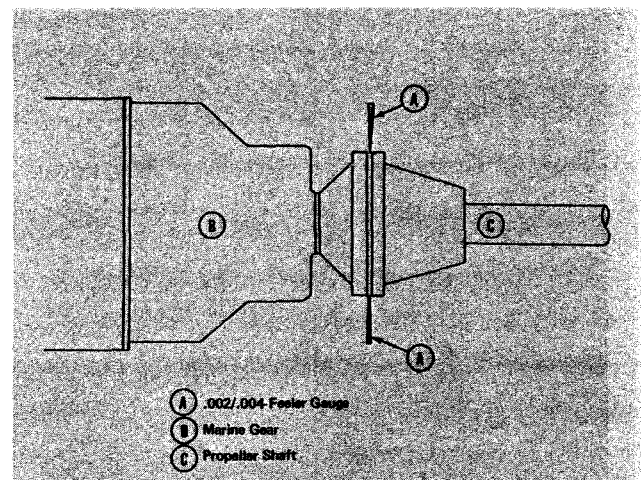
, (V11967). Checking alignment between marine gear and propeller shaft
